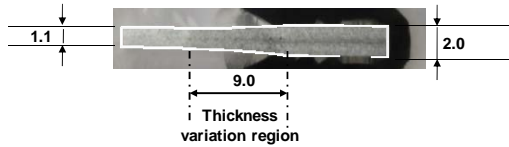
Cross section shape of tailor rolled blank (unit: mm).
